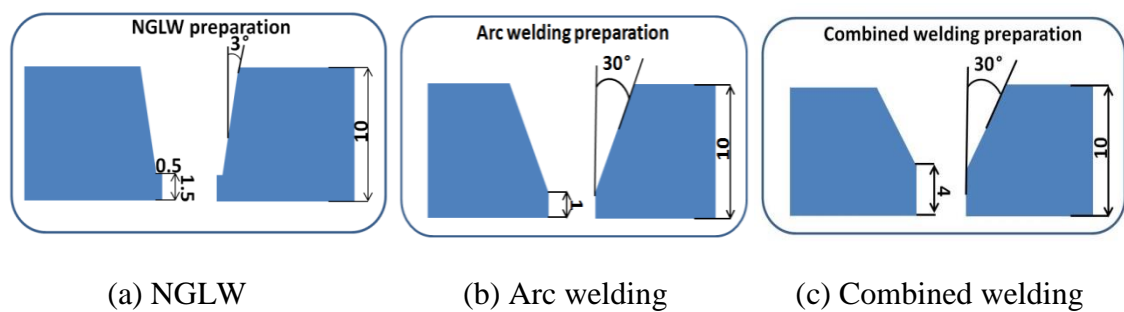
Joint preparation for welding 10 mm thick plates
